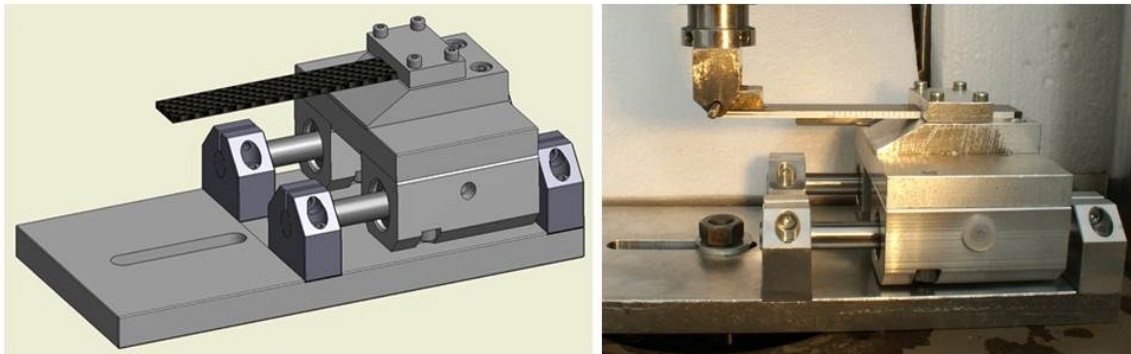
C-ELS fixture constructed at the chair of Material Science and Testing of Plastics at the Montanuniversitaet Leoben, Austria.
